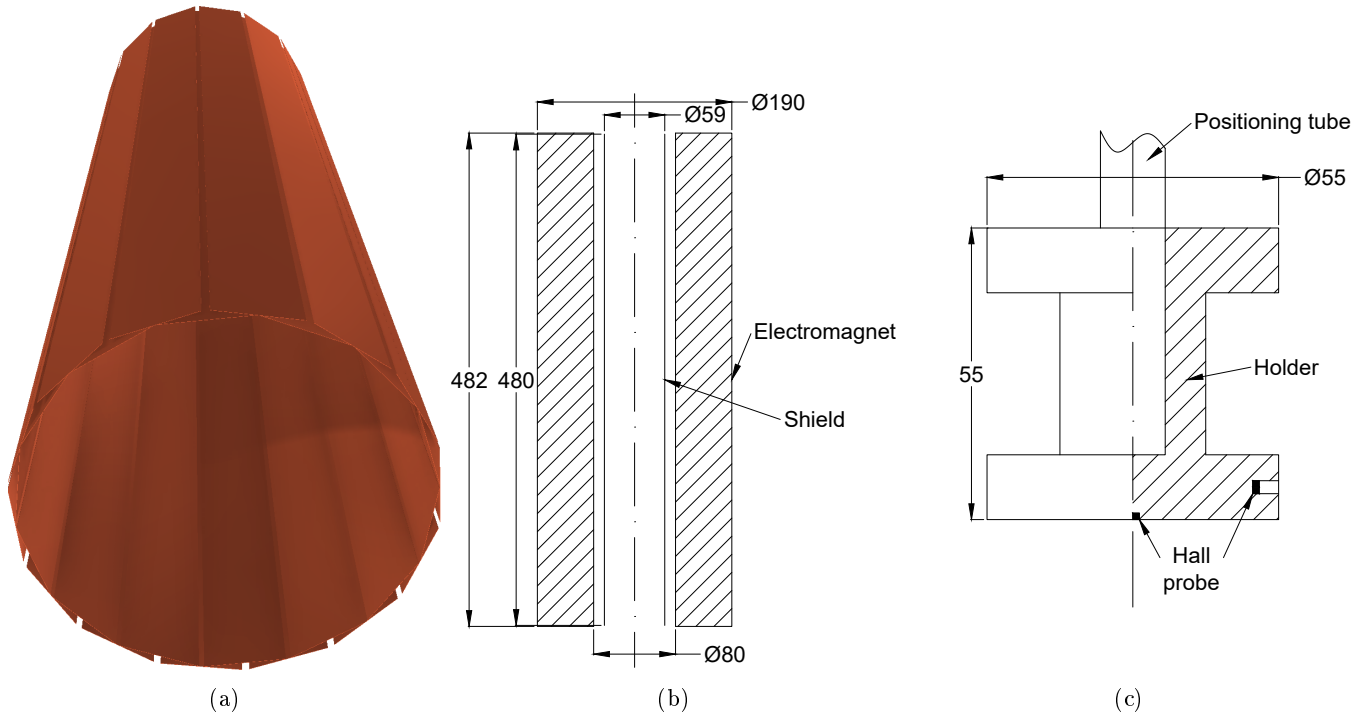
Elements of the test stand. (a) View of the shield, (b) System dimensions, (c) Probe holder
